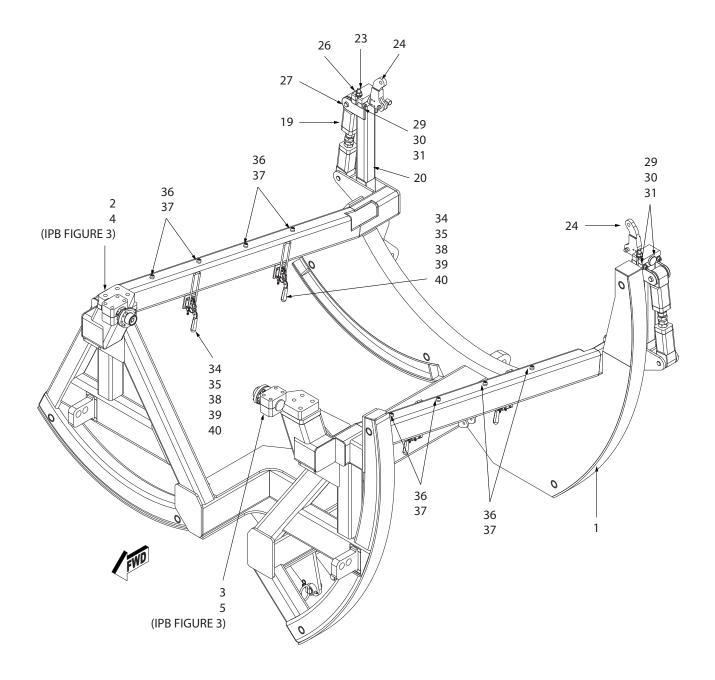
AGSE-E16607-S02 Cradle Assembly
